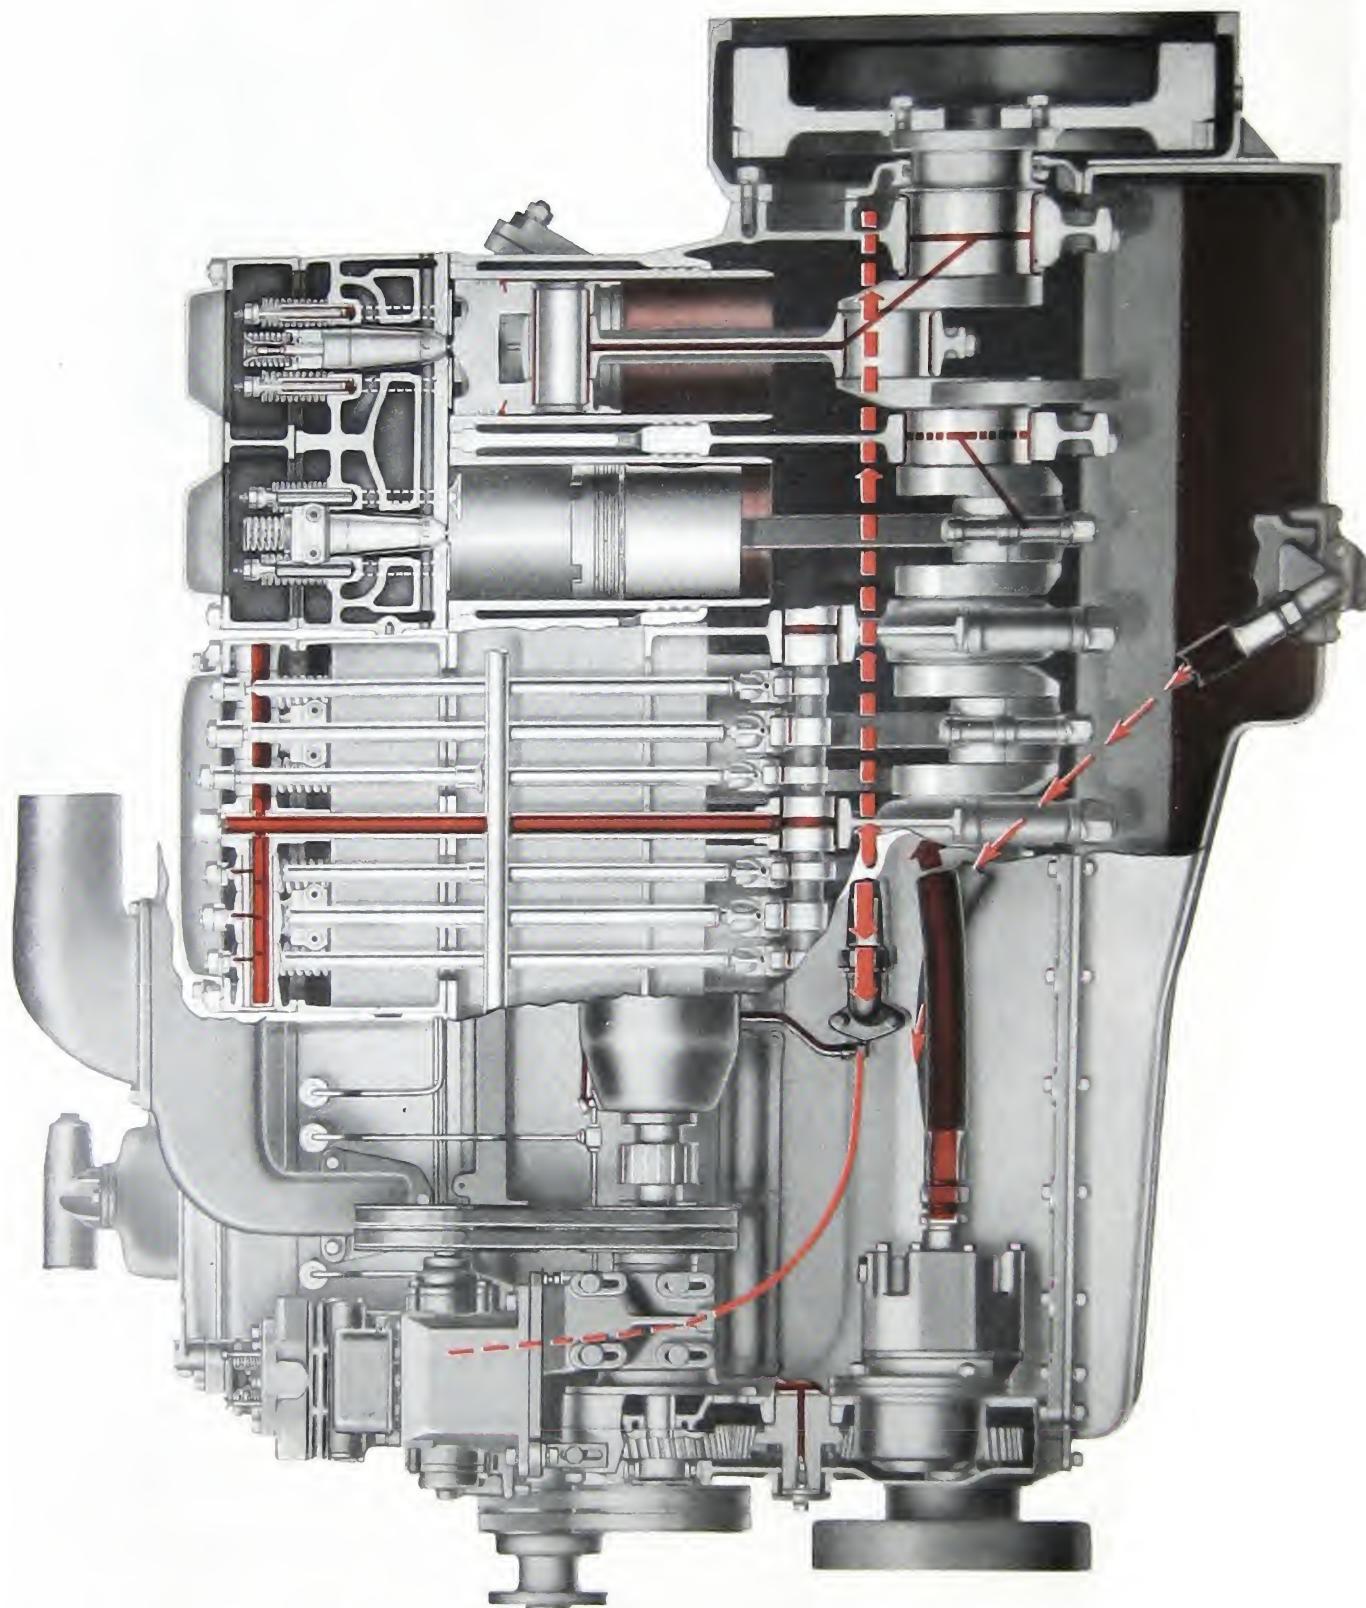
Lubricating oil diagram, side view—Model NH engine
